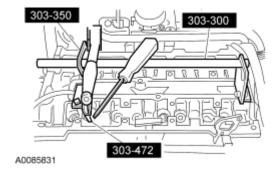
Identifying Special Tools (303-300, 303-350, 303-472) Courtesy of FORD MOTOR CO.
